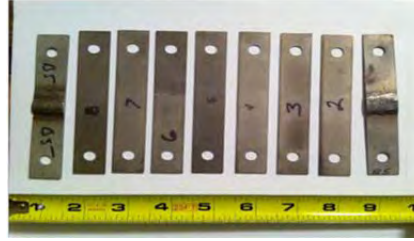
Water jet cutting of the weld plate procured from INL.
